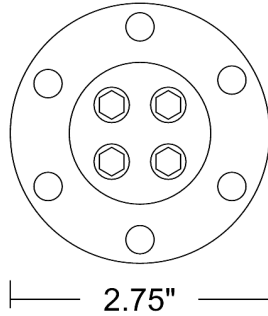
Schematic for the side port flanges for the large chamber. In the center are four SMA connectors. The flange is attached with 6 bolts.
